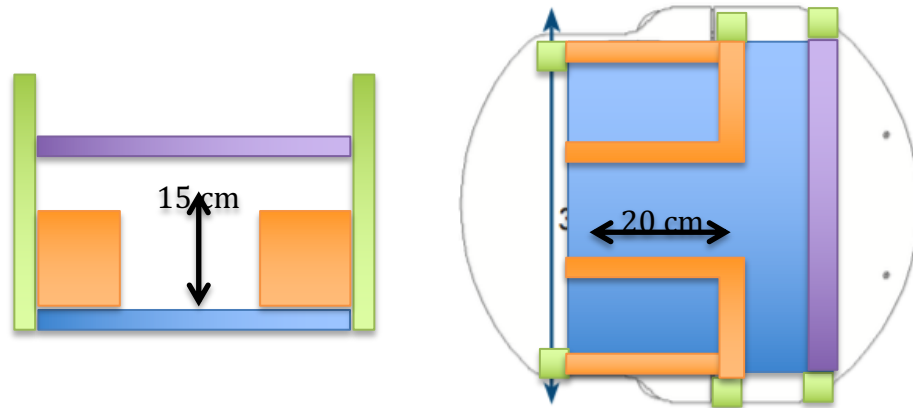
Front view and first level top view of portable acoustic radar frame.
